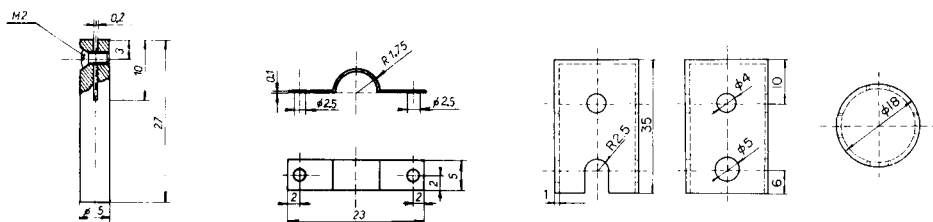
Profiled metal strip (side view and top view) and supporting electrode (side view).
